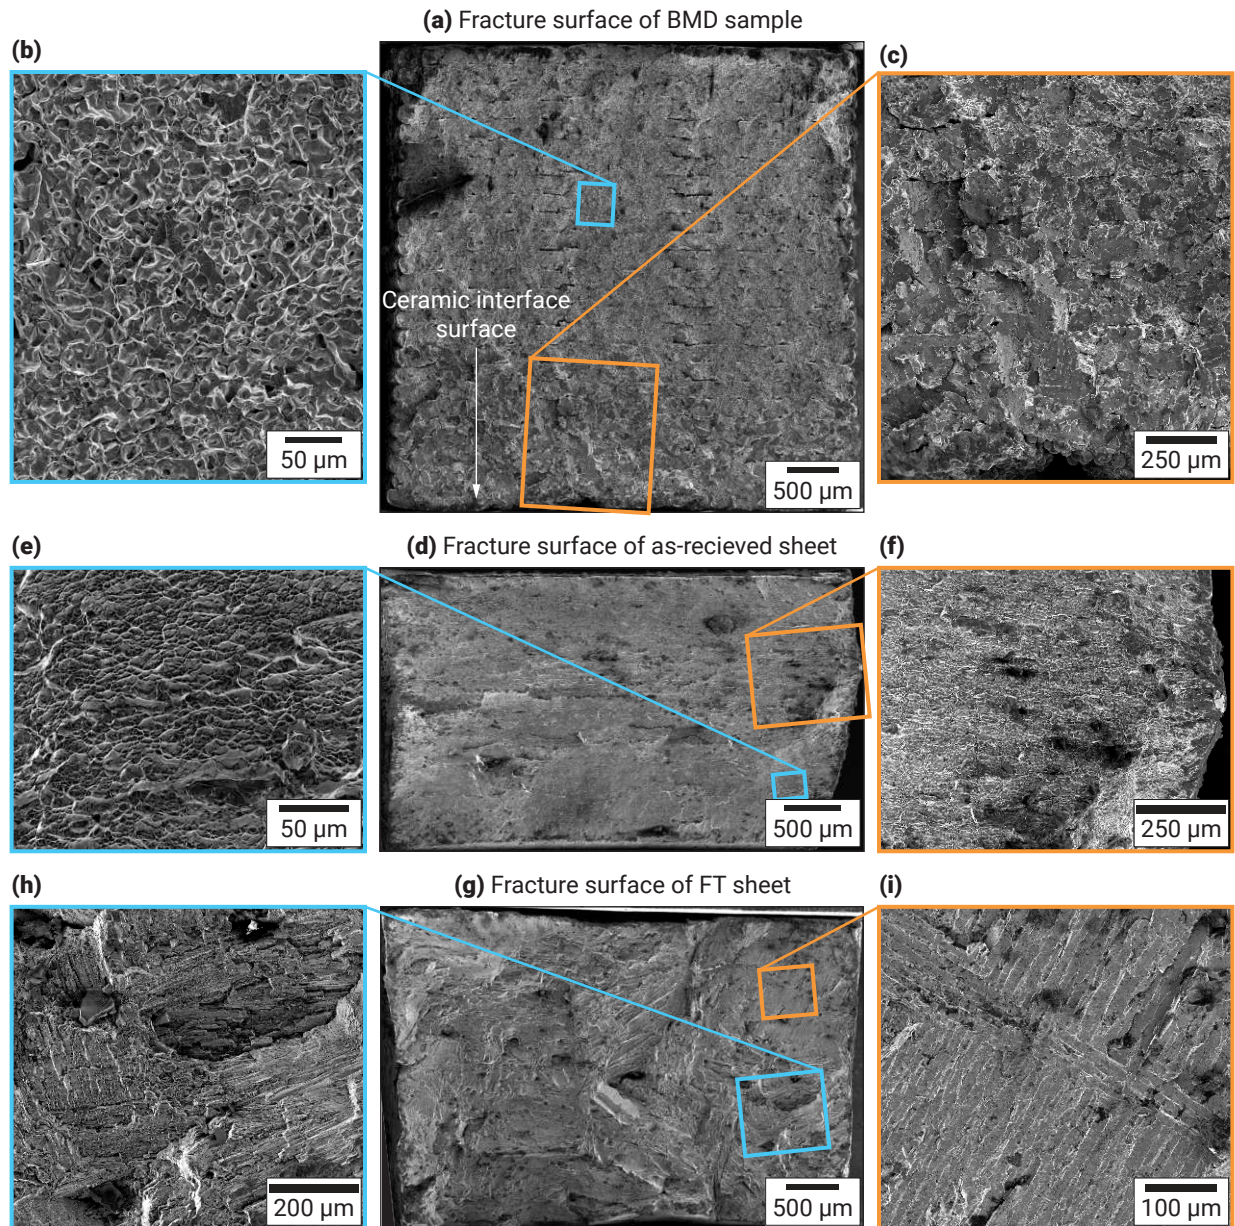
(a) Fracture surface of a BMD sample showing a magnified view of (b), dimple rupture, brittle intergranular decohesion, and (c), brittle quasi-cleavage fracture where the fracture likely initiated. (d) Fracture surface of an as-received sheet sample showing (e), non-uniform cups from dimple rupture and (f), the likely fracture initiation site. (g) Fracture surface of a furnace treated sample showing (h), very coarse intergranular fracture and (i), the known fracture initiation site with the characteristics of a classic brittle cleavage fracture through a single grain.
